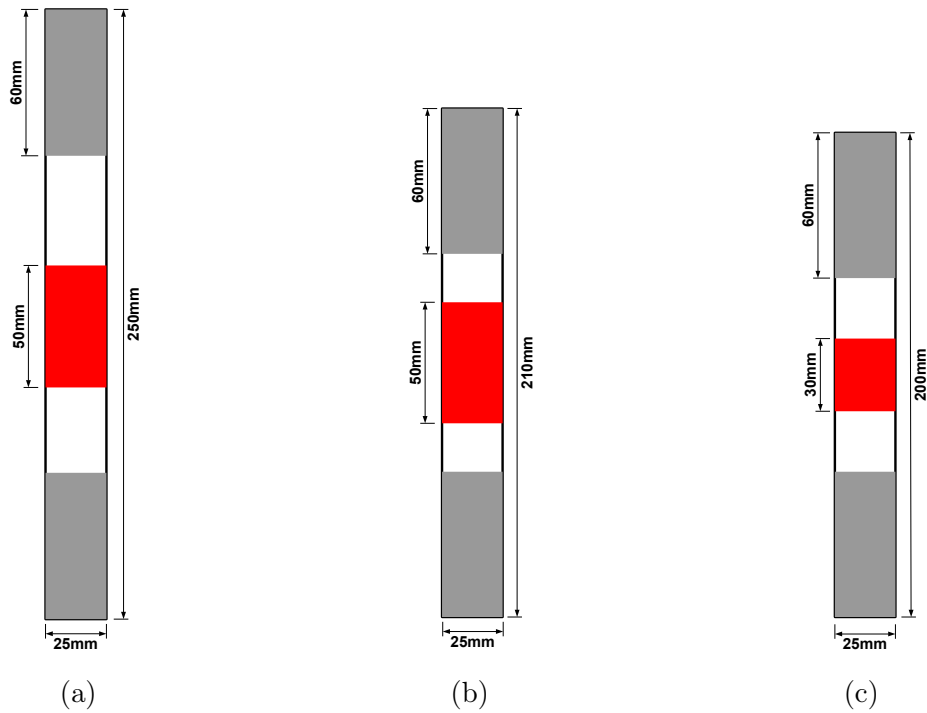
Geometry of the specimens for tensile testing. Geometry (a) was used for stainless steel ($d = 1.00$ mm) and aluminum alloys ($d = 2.50$ mm), geometry (b) for DX54 ($d = 0.75$ mm) and geometry (c) for HC260LA and HC420LA ($d = 2.00$ mm). The red area marks the region where pins were located, at the gray region the specimens were clamped in the testing machine.
